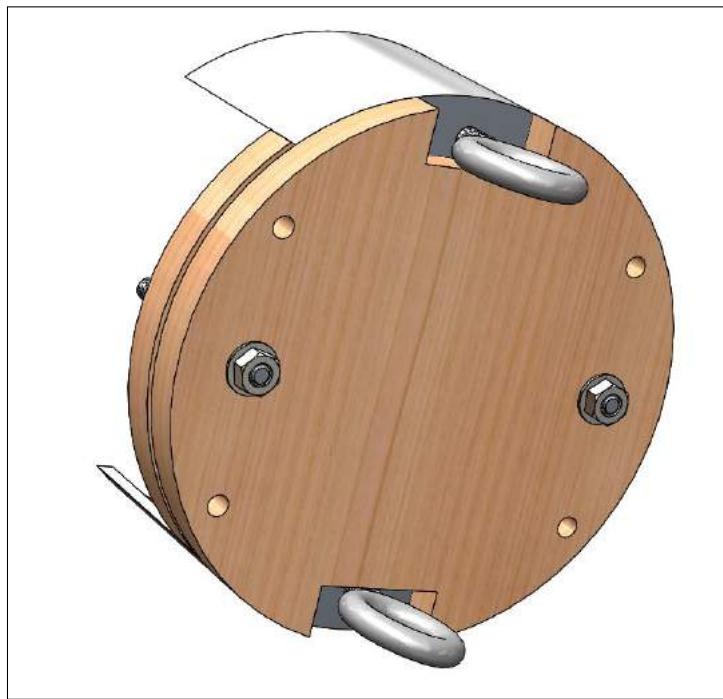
Aft Parachute and BEAVS Mounting Bulkhead Assembly
